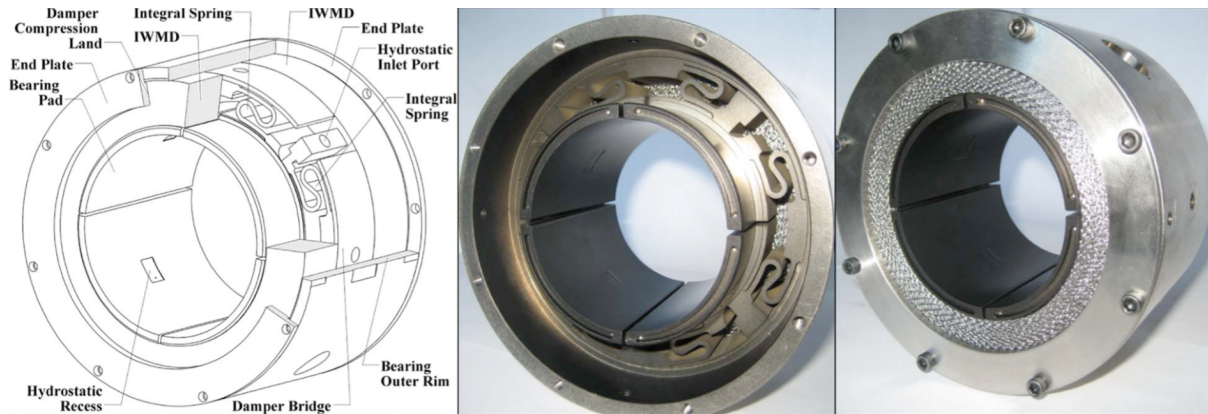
Compliant hybrid journal bearing with a integral wire mass damper using flexures, compliant pivots and integral springs.
